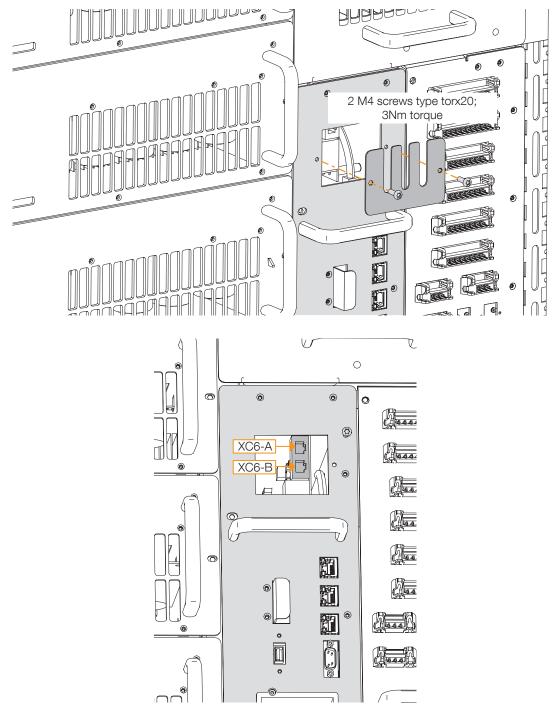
Location of the RJ cables for C-Cabs Master-Extension paralleling
